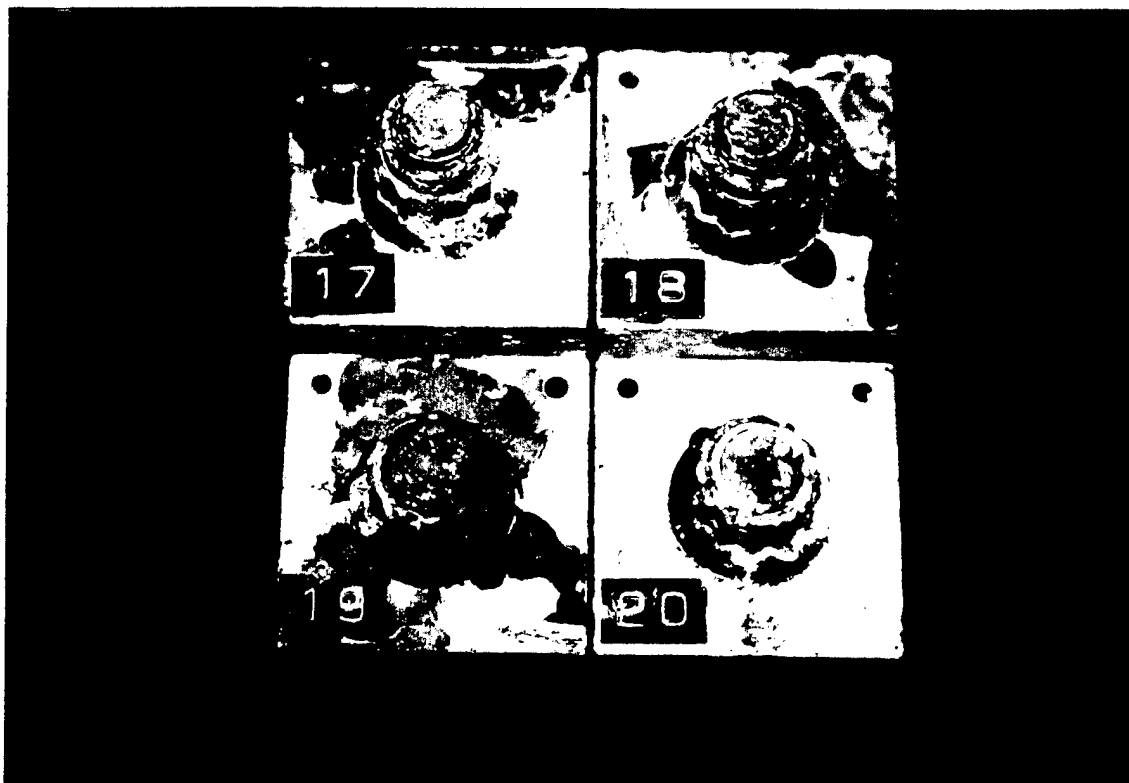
H11 Chromium Hot Work Tool Steel Nuts With IVD Al Coating After 62 Days of Salt Spray. Reduced 25%.
